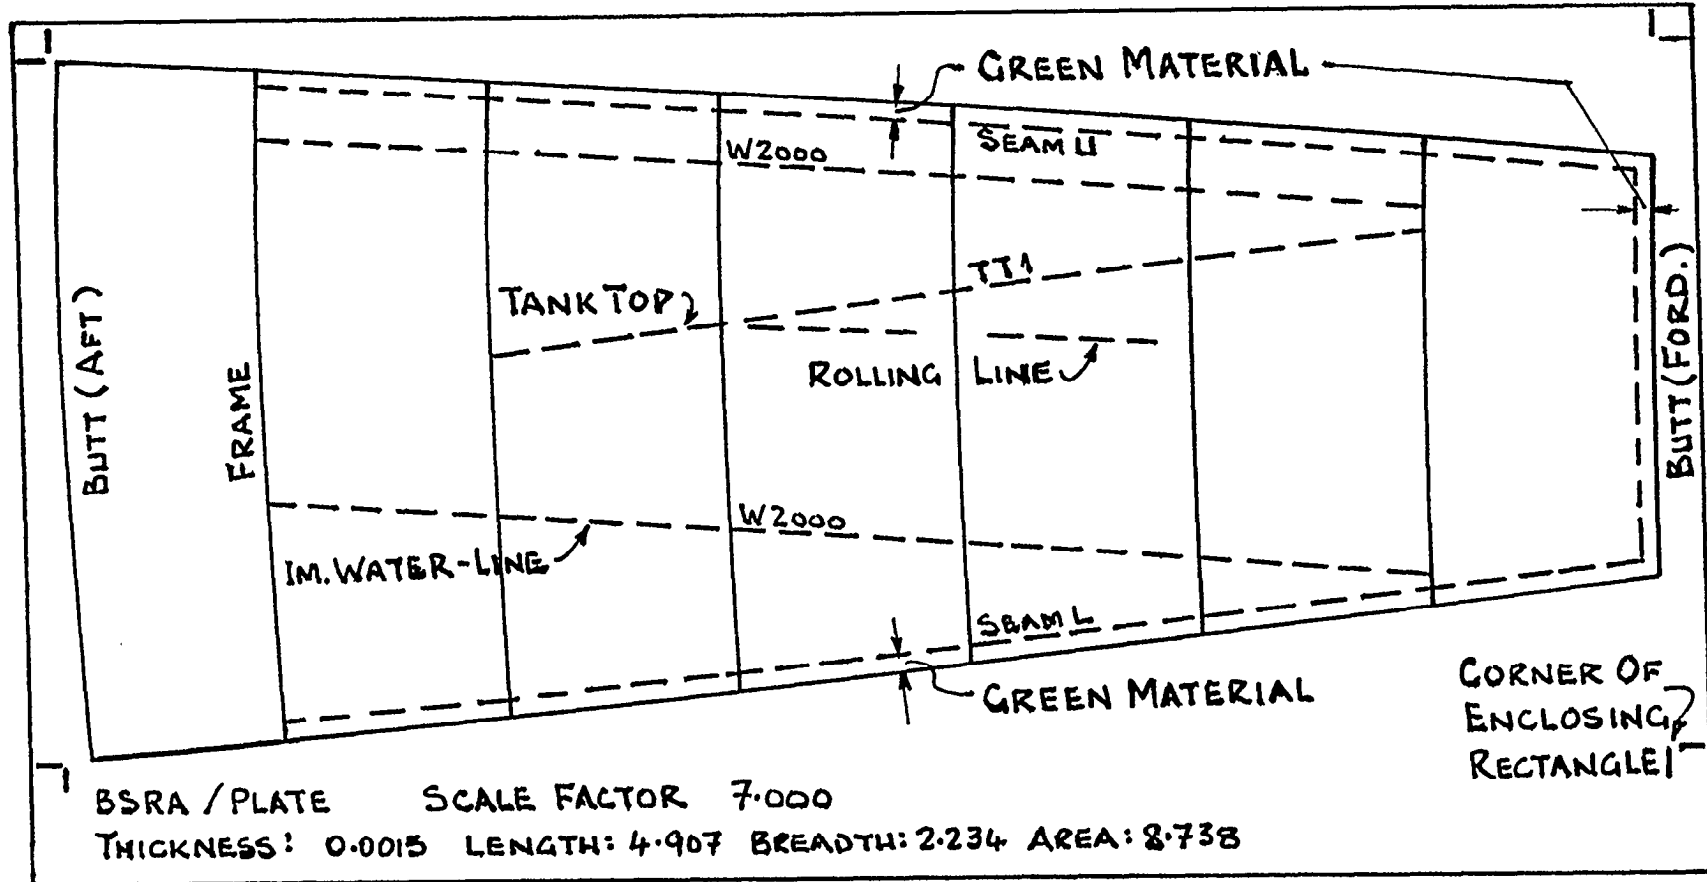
CHECK DRAWING FOR DEVELOPED SHELL PLATE
